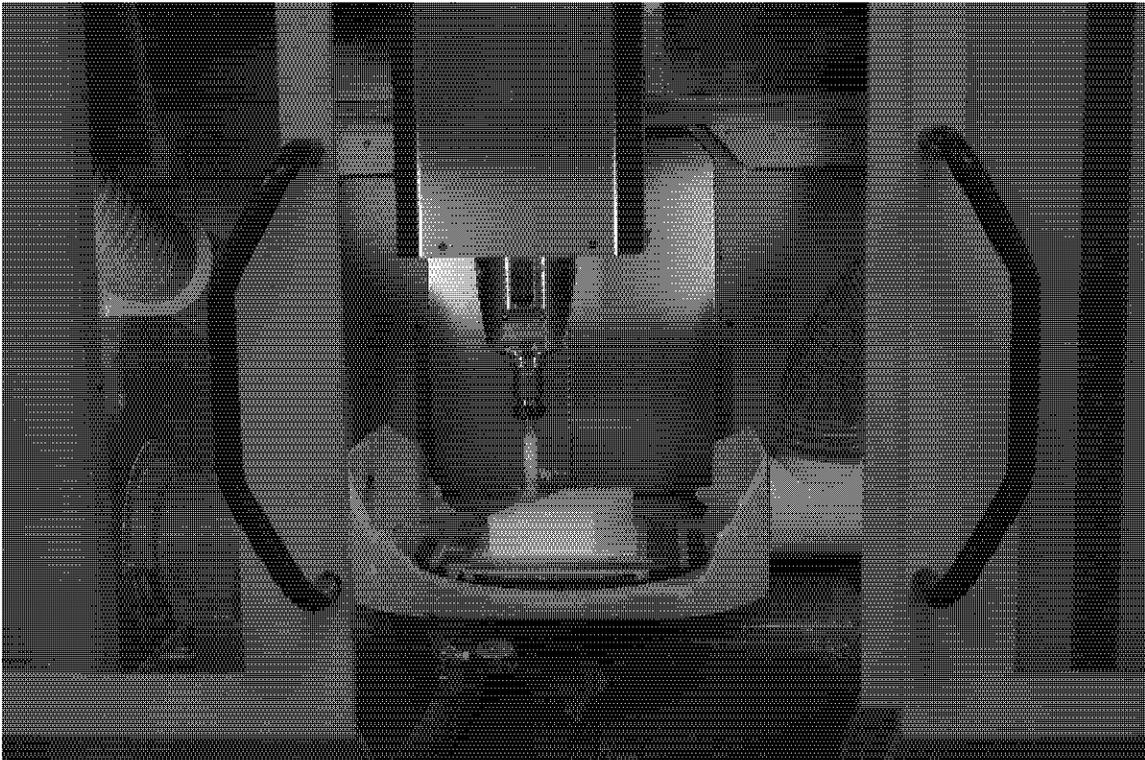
Tile being cut by the fully-automatic Milling Machine, March 9, 2010.
